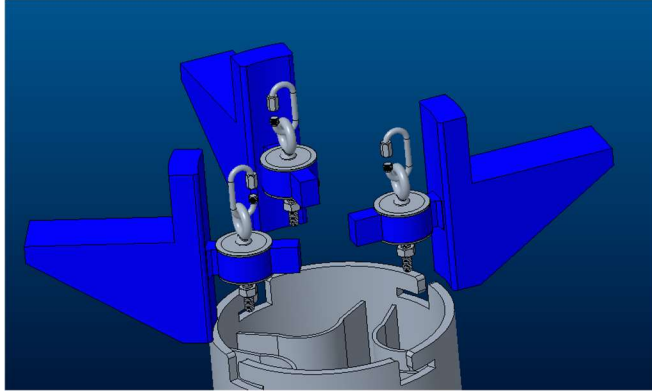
CAD assembly of the launch mechanism foot pedals with hardware.
